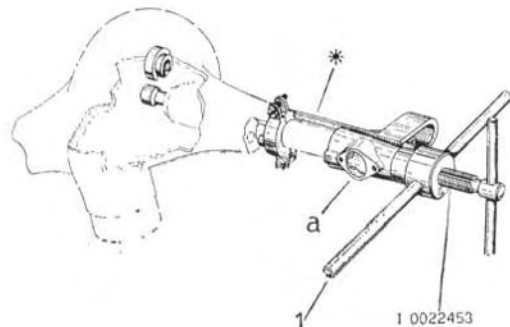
Re-assembling the sleeve with front brake lever housing
